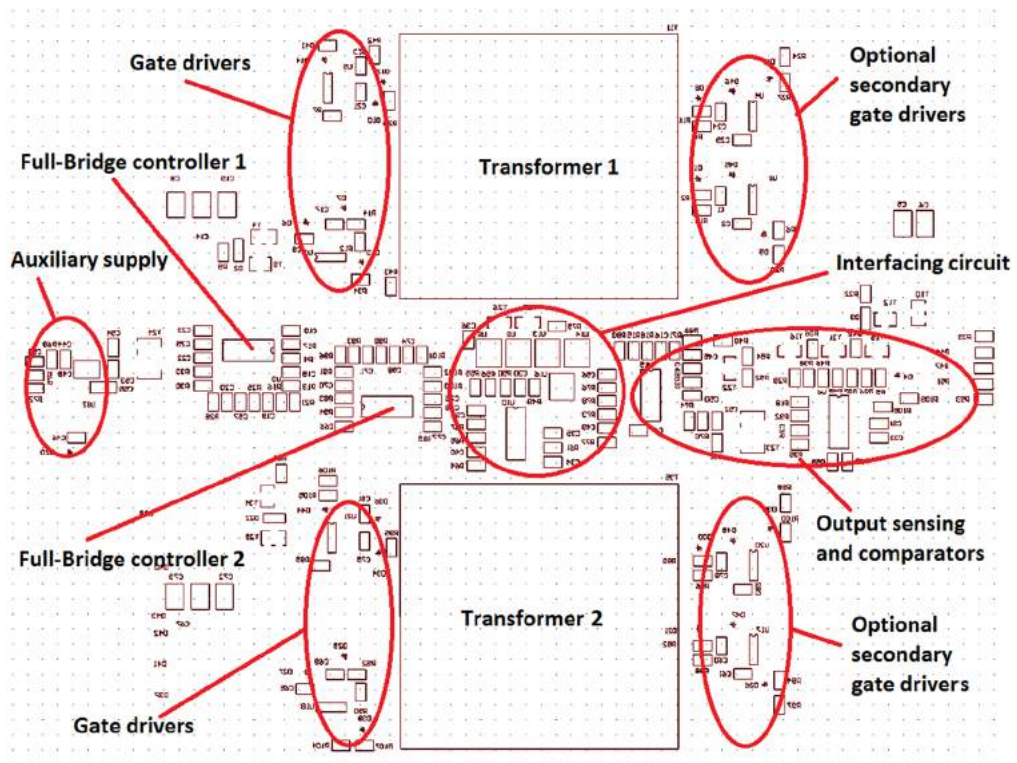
Components layout on the bottom side of the 4-layer PCB
